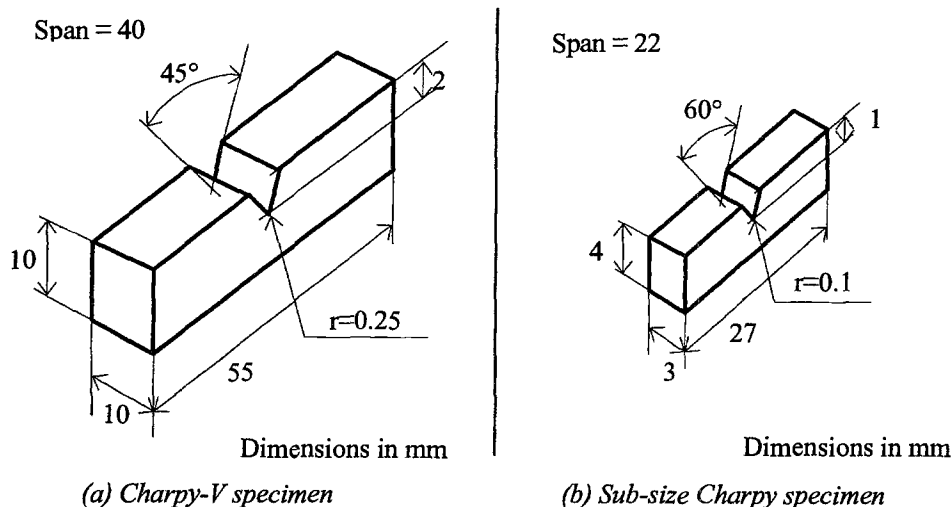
Main dimensions of (a) Charpy-V specimen (from [11]) and (b) sub-size Charpy specimen (from [12]).
